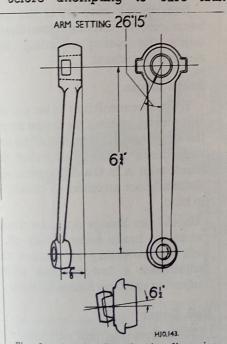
Steering Arm showing dimensions and the mark on the face for correct arm setting on the splined cross shaft.
